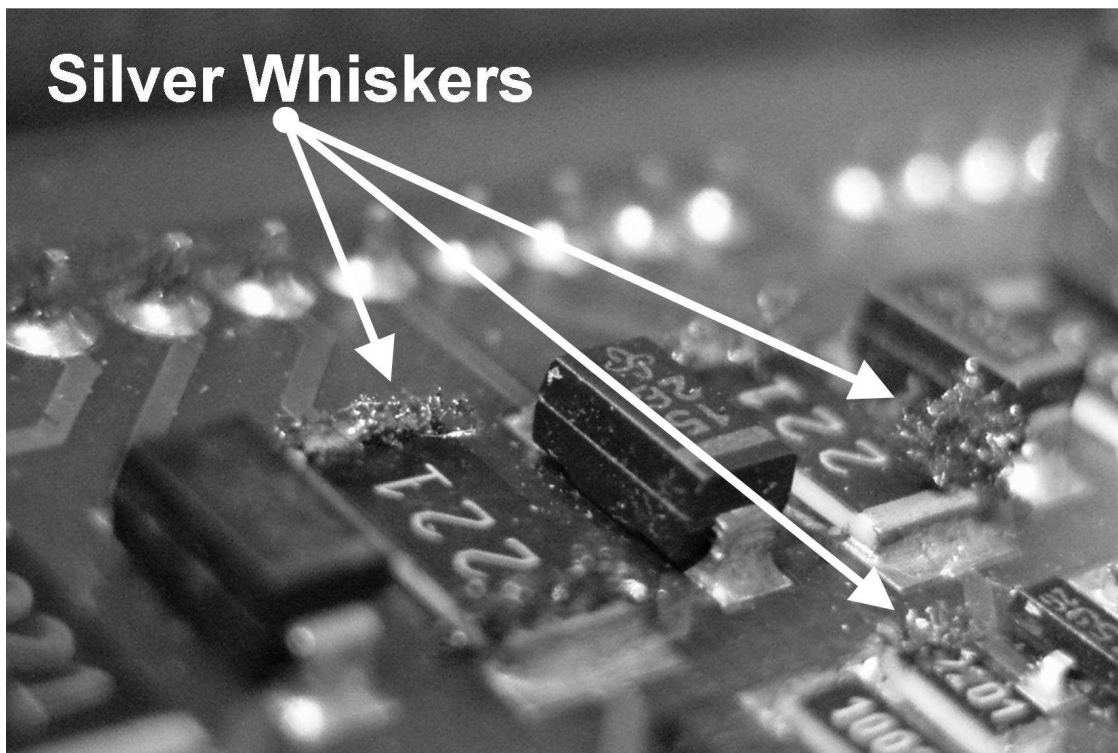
Silver Whiskers Growing out of Circuit Board Components.
